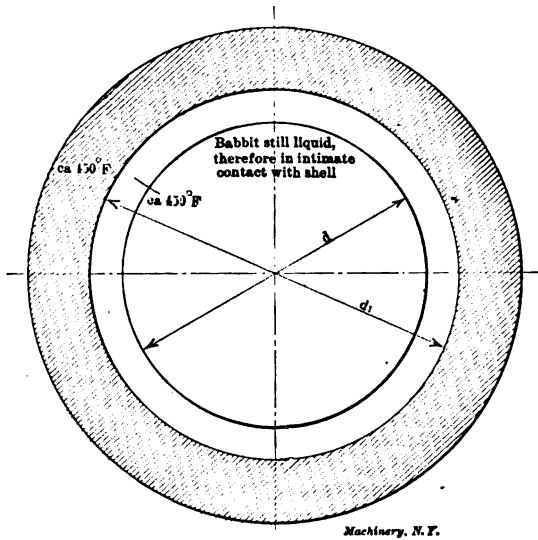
One-piece Bearing; Babbitt just Poured. Both Shell and Babbitt at the Solidifying Temperature.
